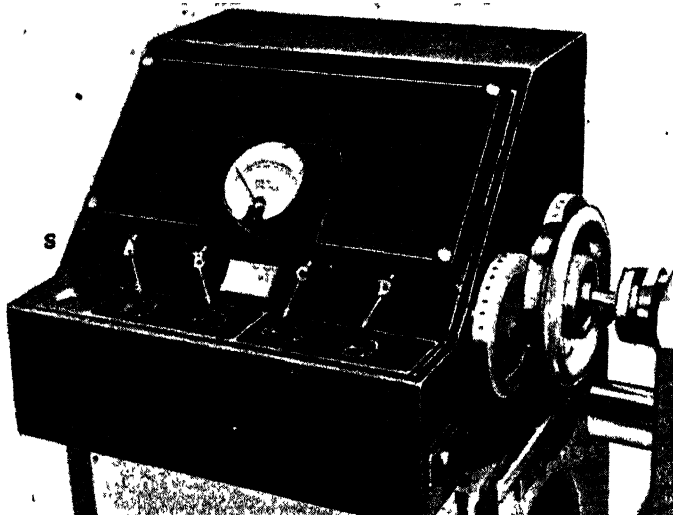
CONTROLS OF GISHOLT CRANKSHAFT BALANCING MACHINE
